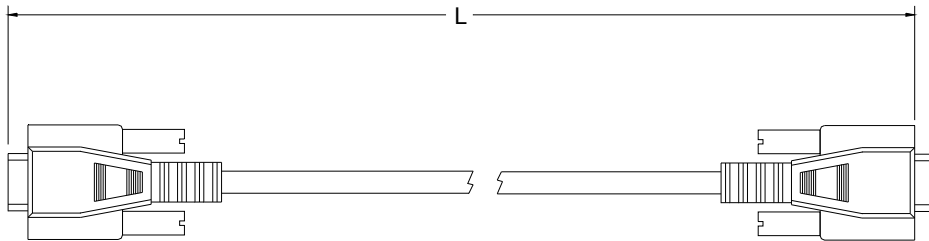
shows the wiring for the external I/O terminal block adapter cable.
